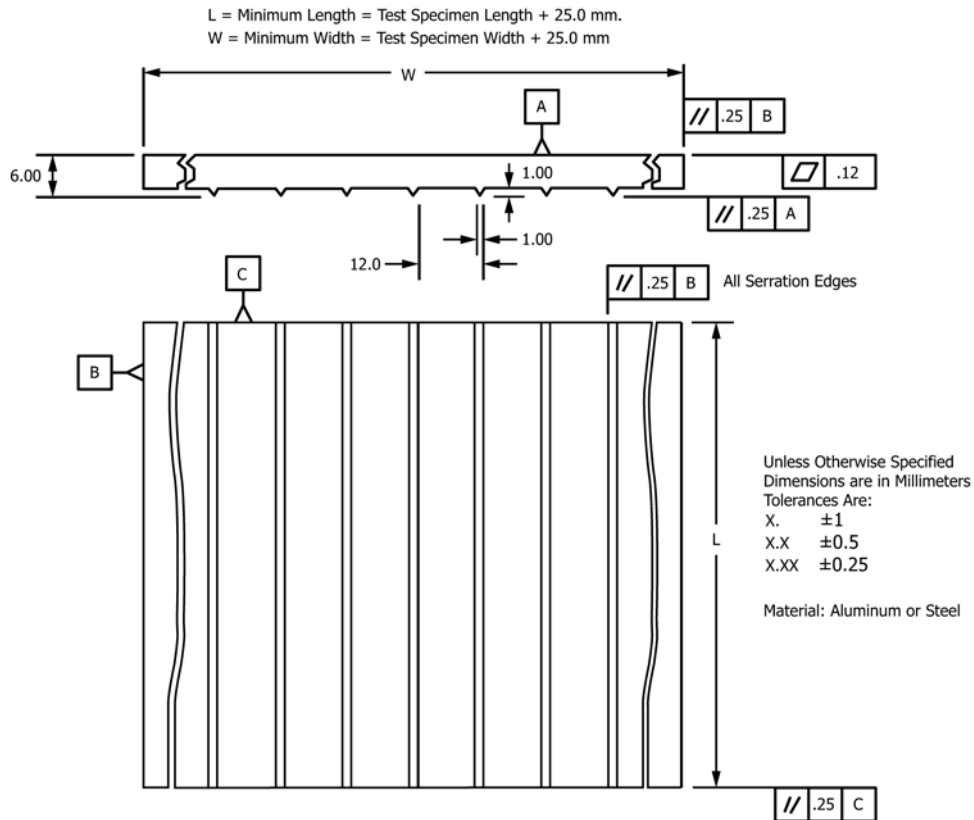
Representative Serrated Plate for Honeycomb Core Material Pre-Crushing (SI Version)
